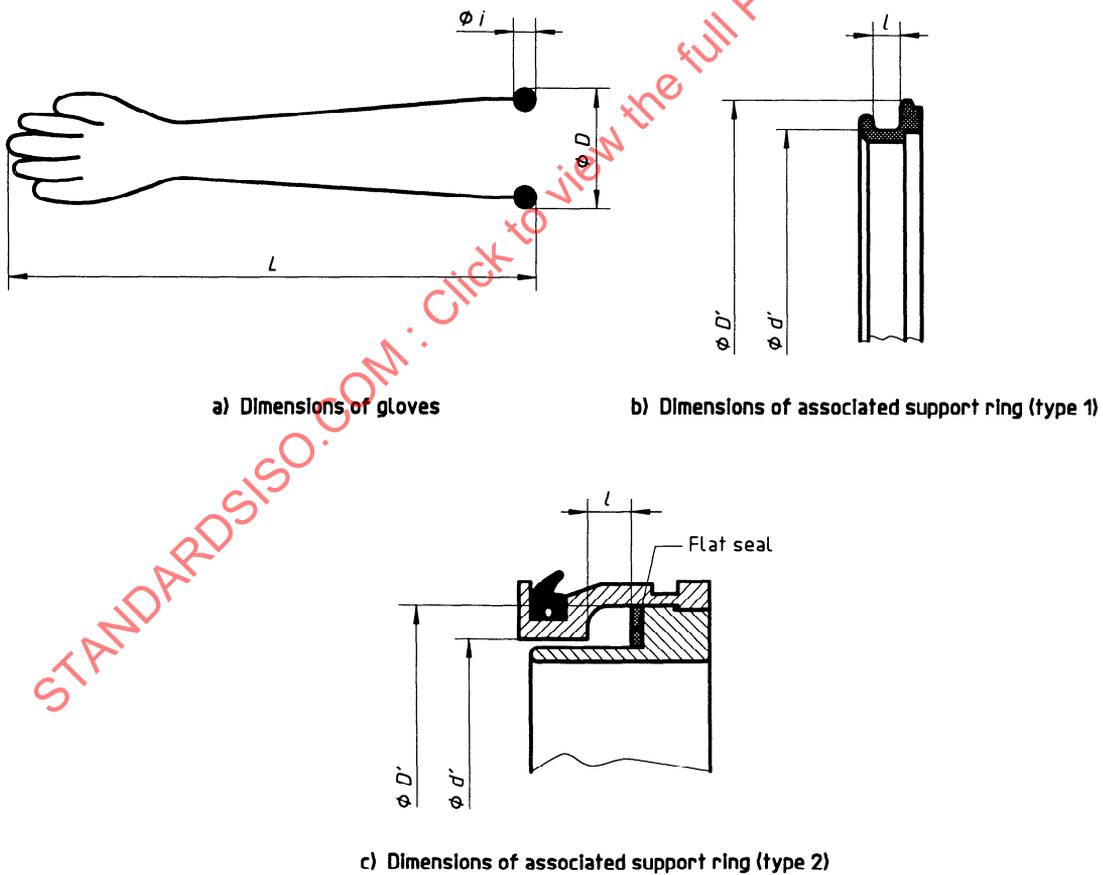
Dimensions of gloves fitted on ejectable support rings
